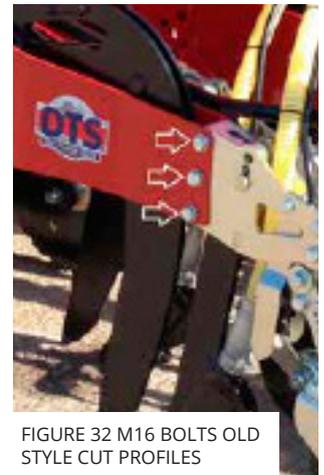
M16 BOLTS OLD STYLE CUT PROFILES
